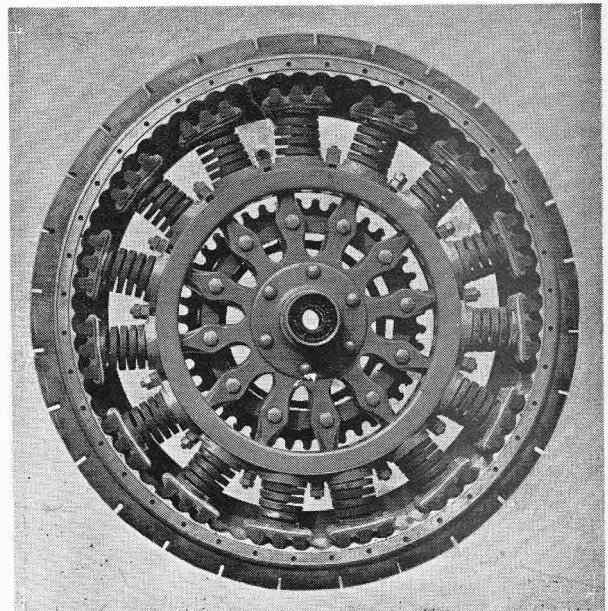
Complete assembled and loaded wheel, showing how rubber pads disengage and engage with corrugations of inner channel.
